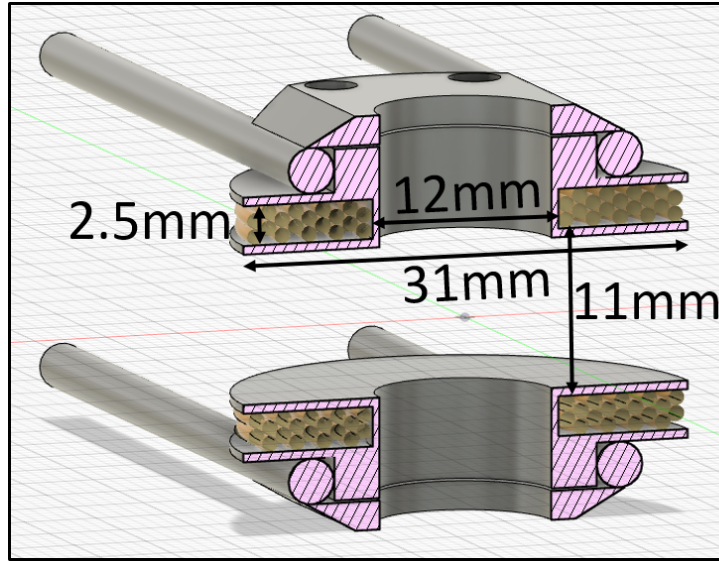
CAD drawing of the mounted coils and coil housing.
